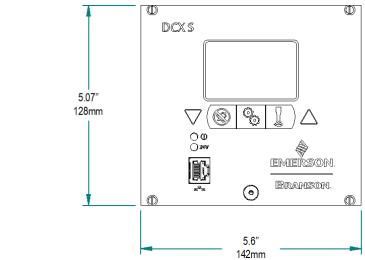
DCX S Power Supply Dimensional Drawing (Medium)
